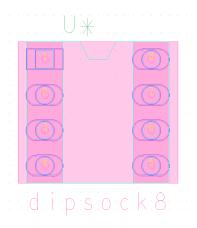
Package symbol (footprint) for a DIP8 in a socket.
